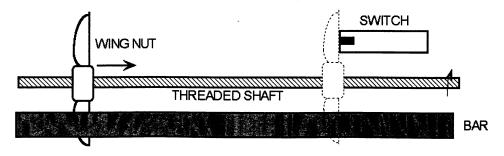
Non-turning nut moves along a rotating, threaded shaft.
